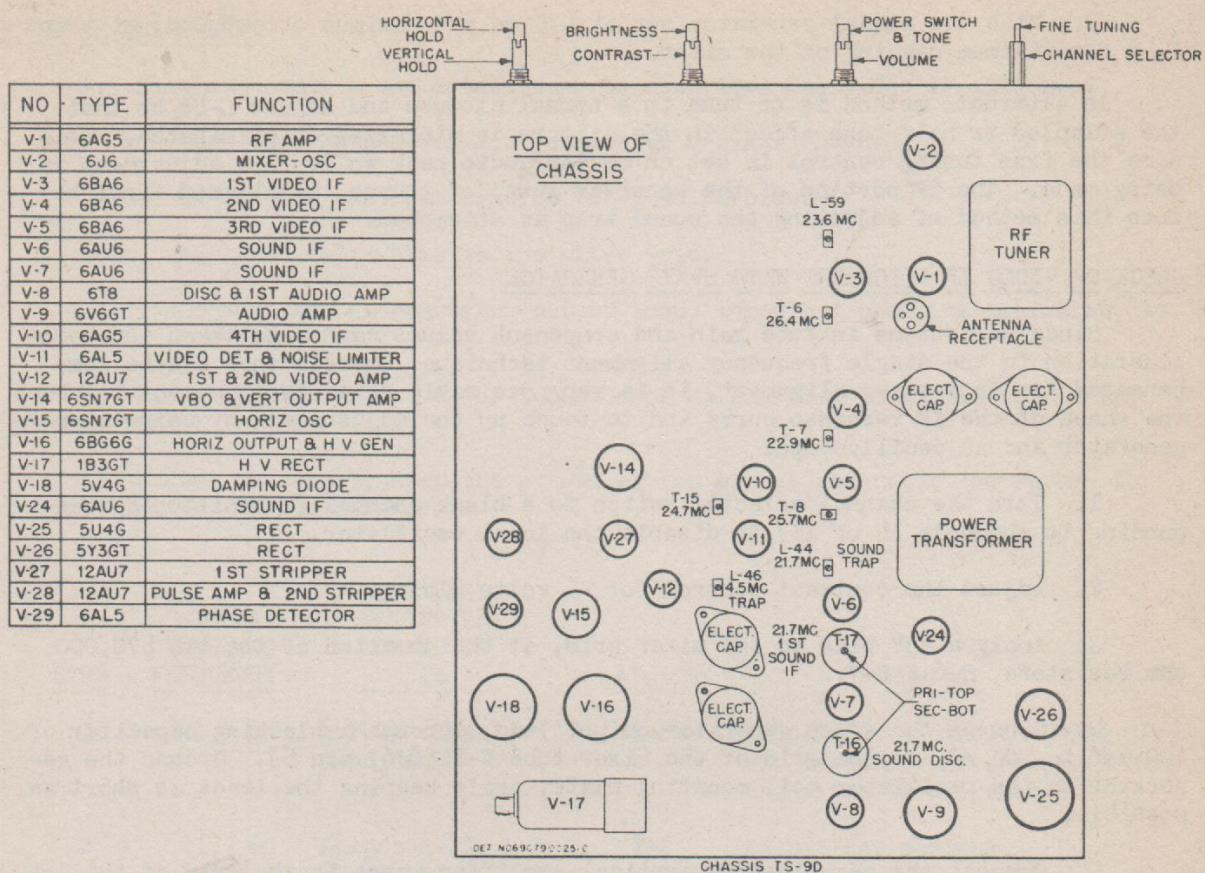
CHASSIS TS-9D TUBE & IF ADJUSTMENT LOCATIONS
